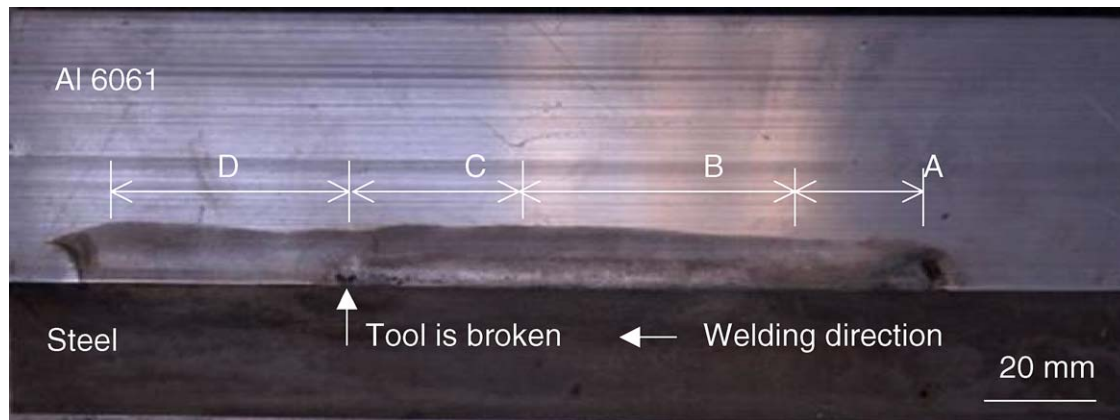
Backside view of the welded Al 6061–steel plates showing the probe breakage after the tool travels 100 mm.
